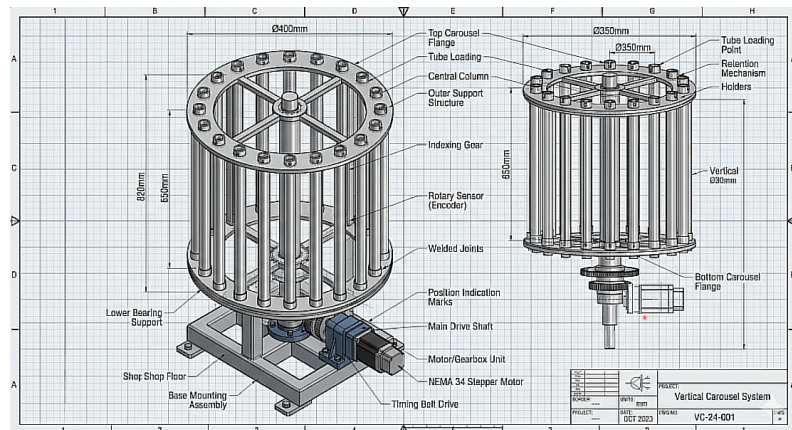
Design Option 2 - Rotating drum mechanism relying on stepper motor accuracy and gravity dispensing.
